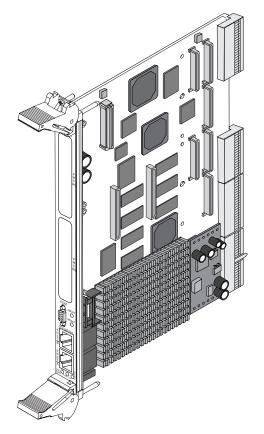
Typical Netra CP2160 Board Assembly With Heat Sink
